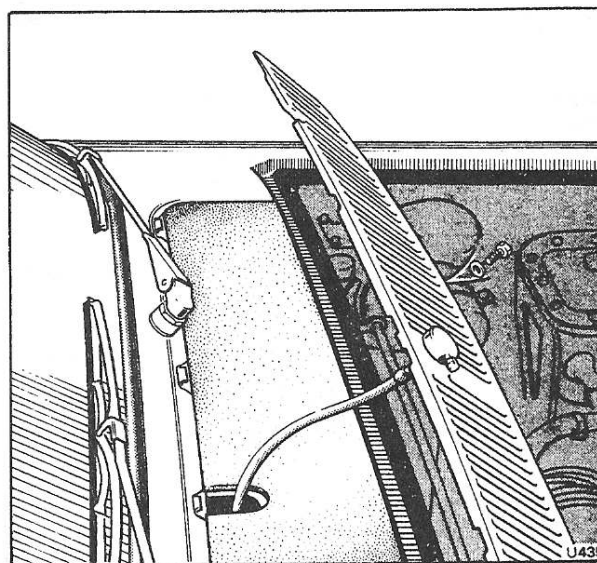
Removing an air intake grille panel (Silver Shadow II, Bentley T2, Silver Wraith II and Corniche)
